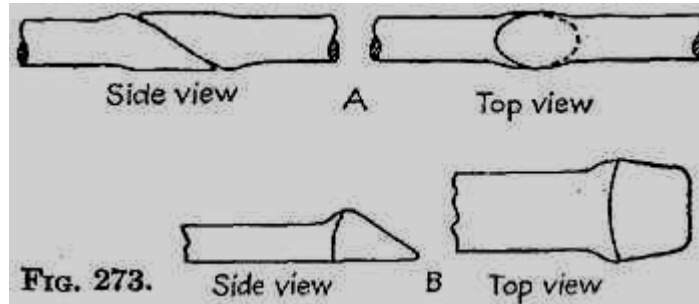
A. Round rods upset, scarfed, and in position for welding. B. Flat bar upset and scarfed for welding.
